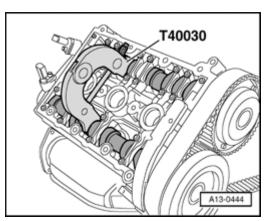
Turning Engine Until Cams At Intake And Exhaust Camshaft Of Cylinder 3 (Right Cylinder Bank) Point Upward Uniformly
